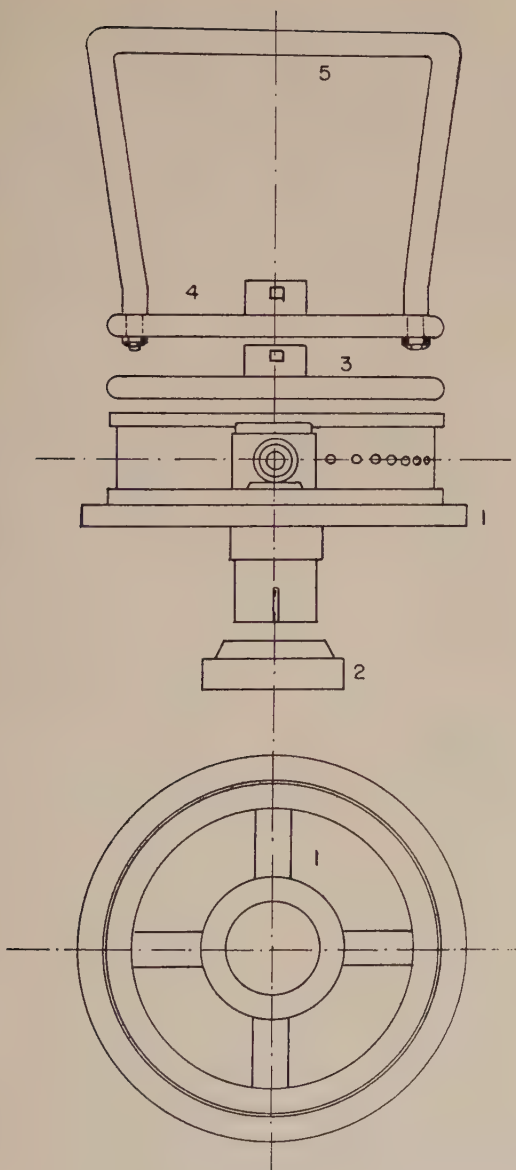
Diagram showing principal parts of the loop wheel machine.
